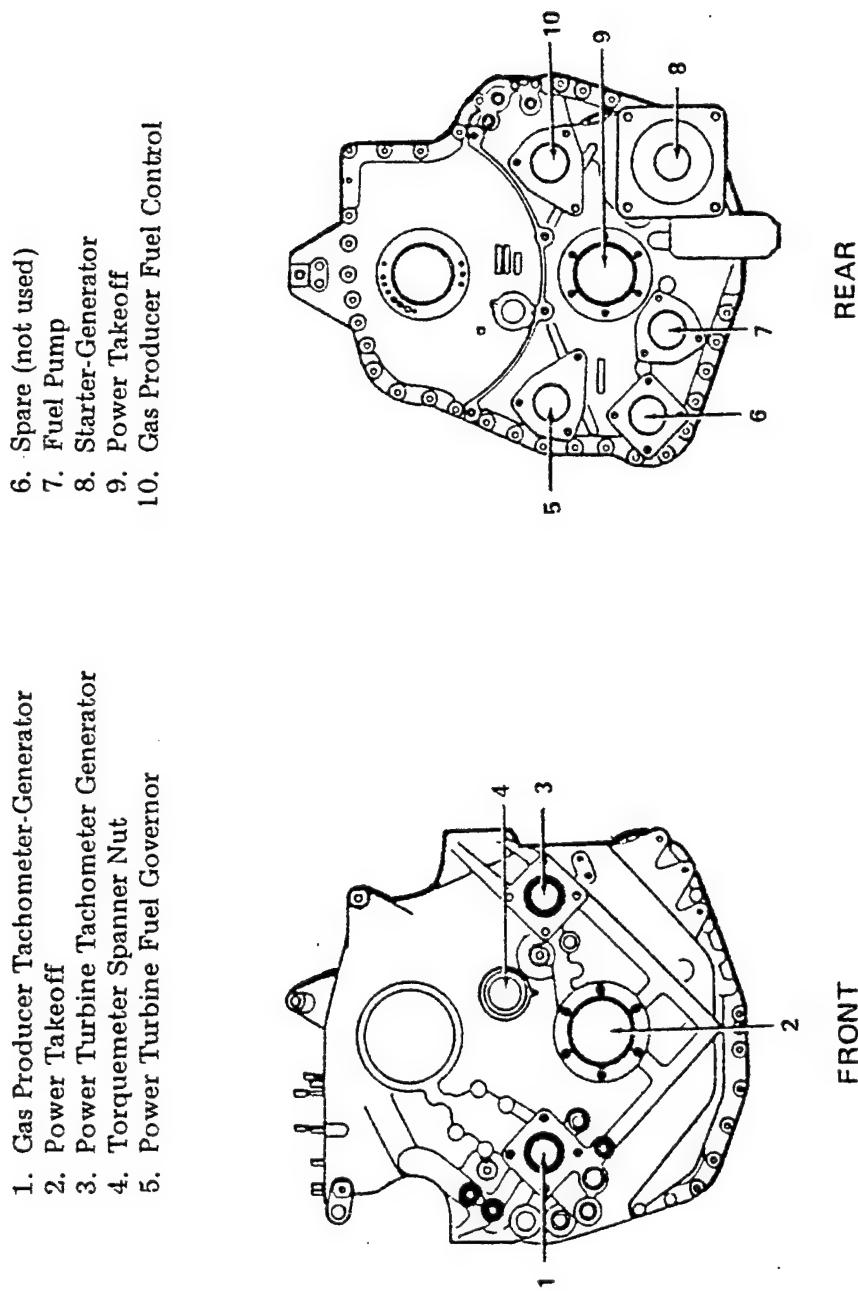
T63-A-700 Power and Accessories Gearbox. "From Ref. [2]."
